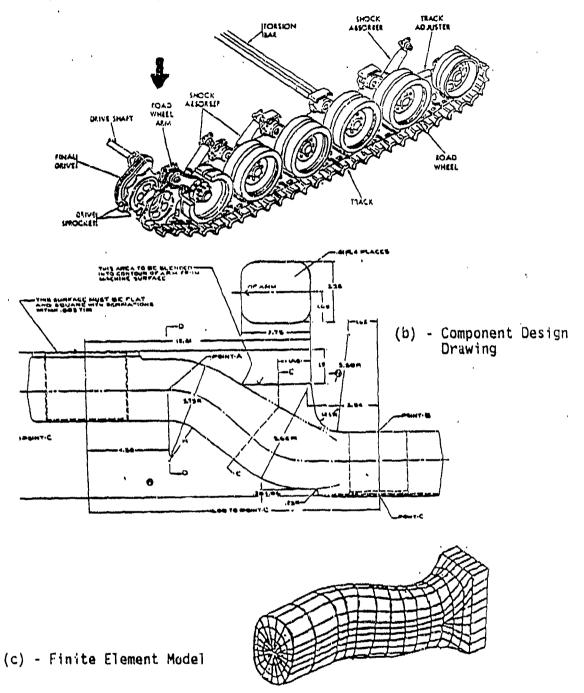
Redesign with Finite-Element Stress Analysis of Tank Wheel Arm
